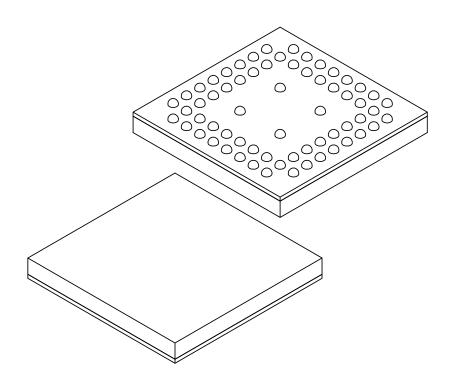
2HW Package Dimensions, Sheet 2
